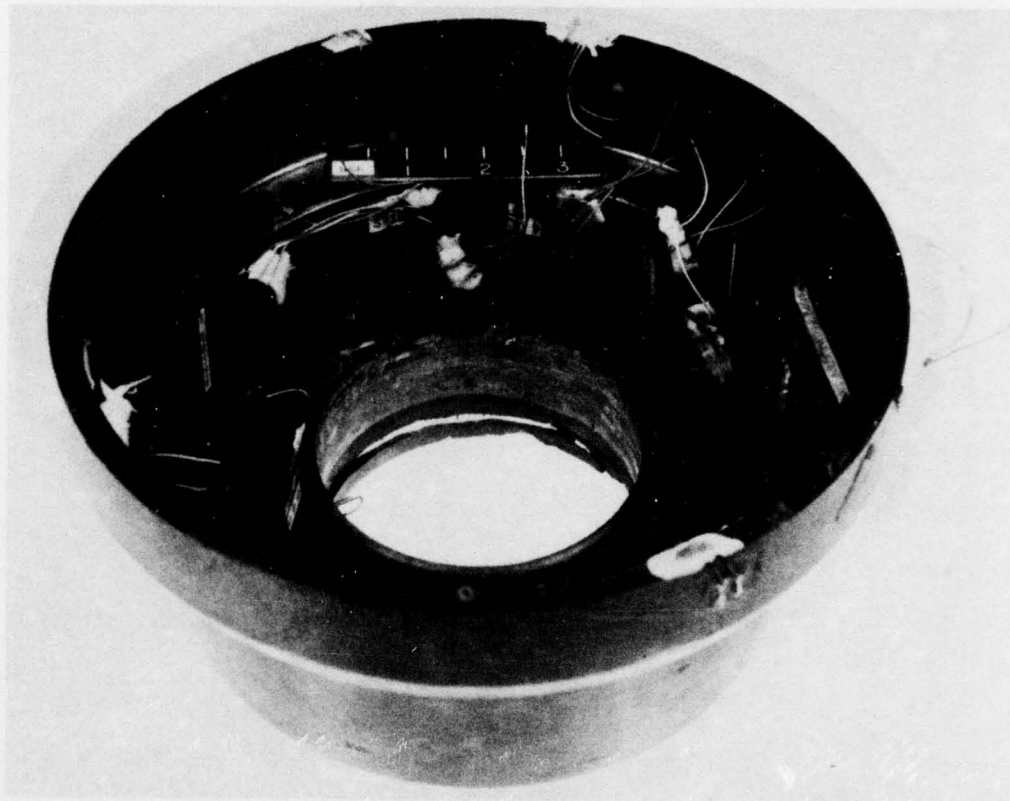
Hub Wheel Half 1000 Mile Straight Roll
